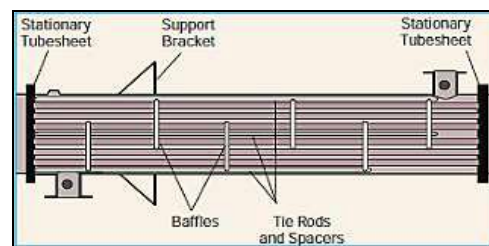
Shell & Tube Type Heat Exchanger fixed tube bundle
